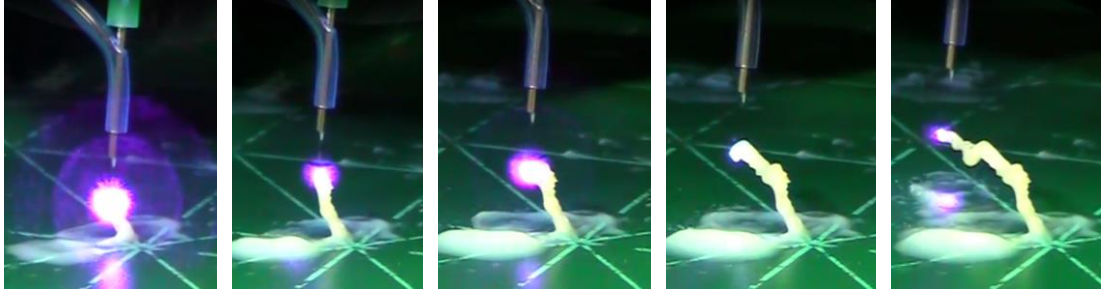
Preliminary printing test with prototyped apparatus (20s, 40s, 50s, 60s, and 80s)
